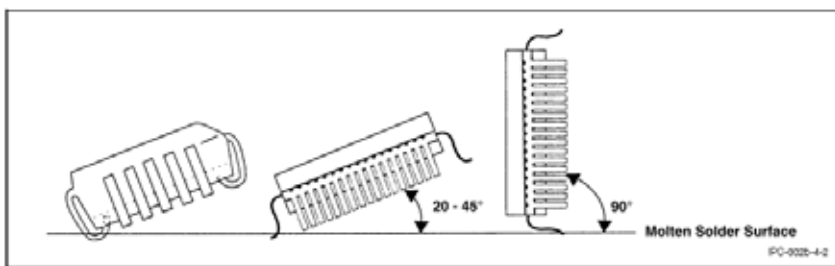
Solder Dipping Angle for Surface Mount Ledged Components
